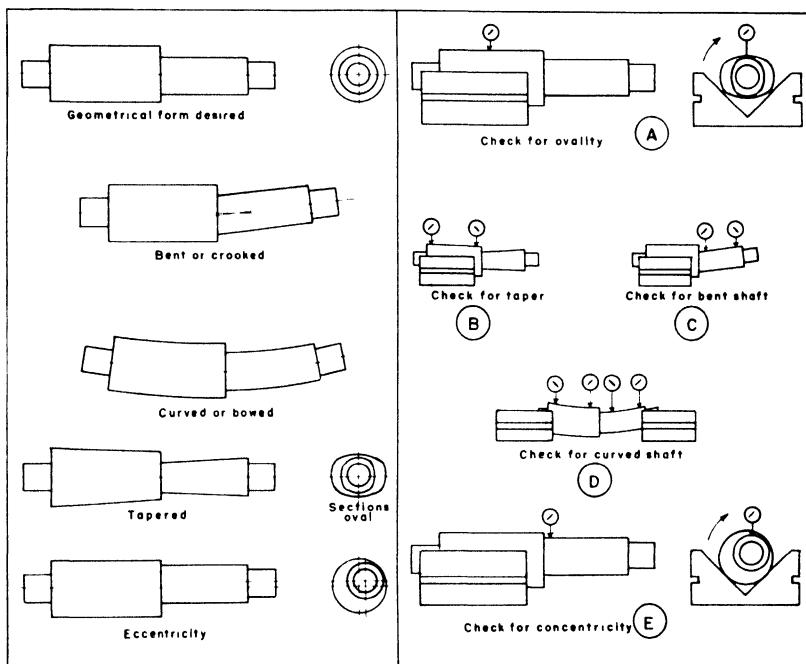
Several undesirable conditions which may be present in a work-piece and methods of checking for them.
